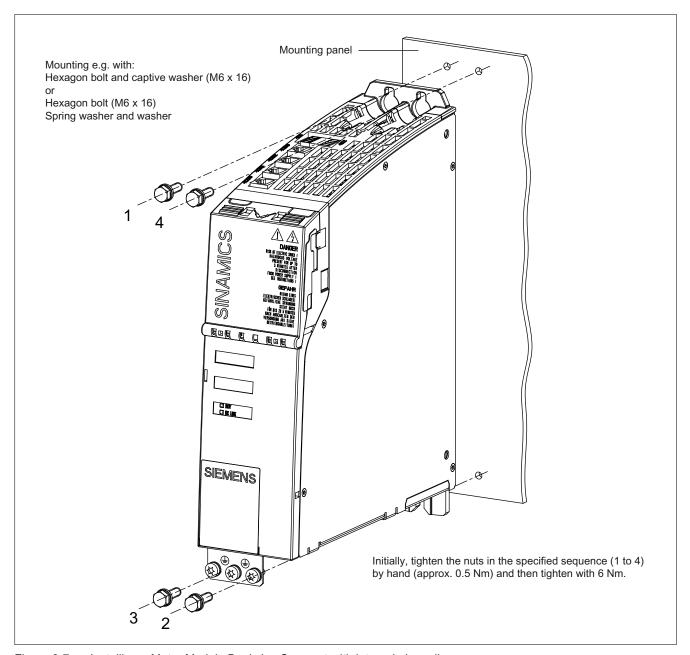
Installing a Motor Module Booksize Compact with internal air cooling
